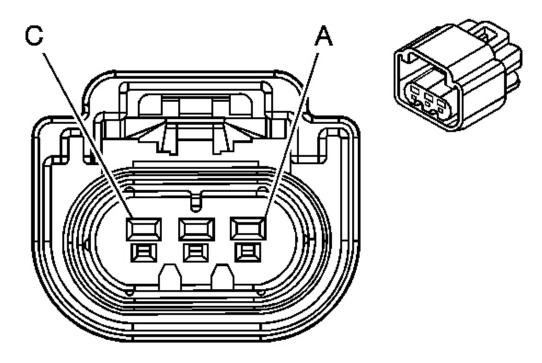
Headlamp - Left (Domestic) Connector End View Courtesy of GENERAL MOTORS CORP.
